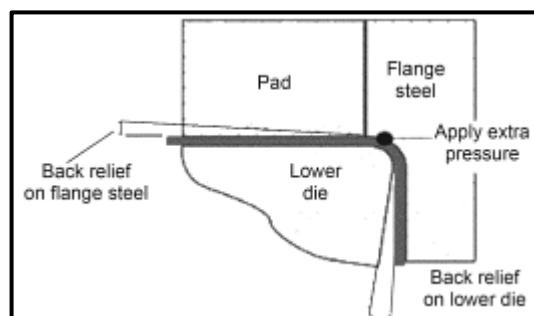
Schematic of overbending to compensate for spring back in bending (Altan & Tekkaya, 2012)
